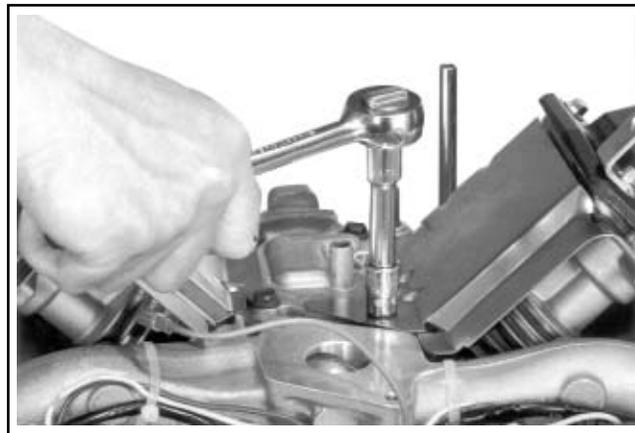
Removing Fasteners Holding Baffle and Breather Cover.
